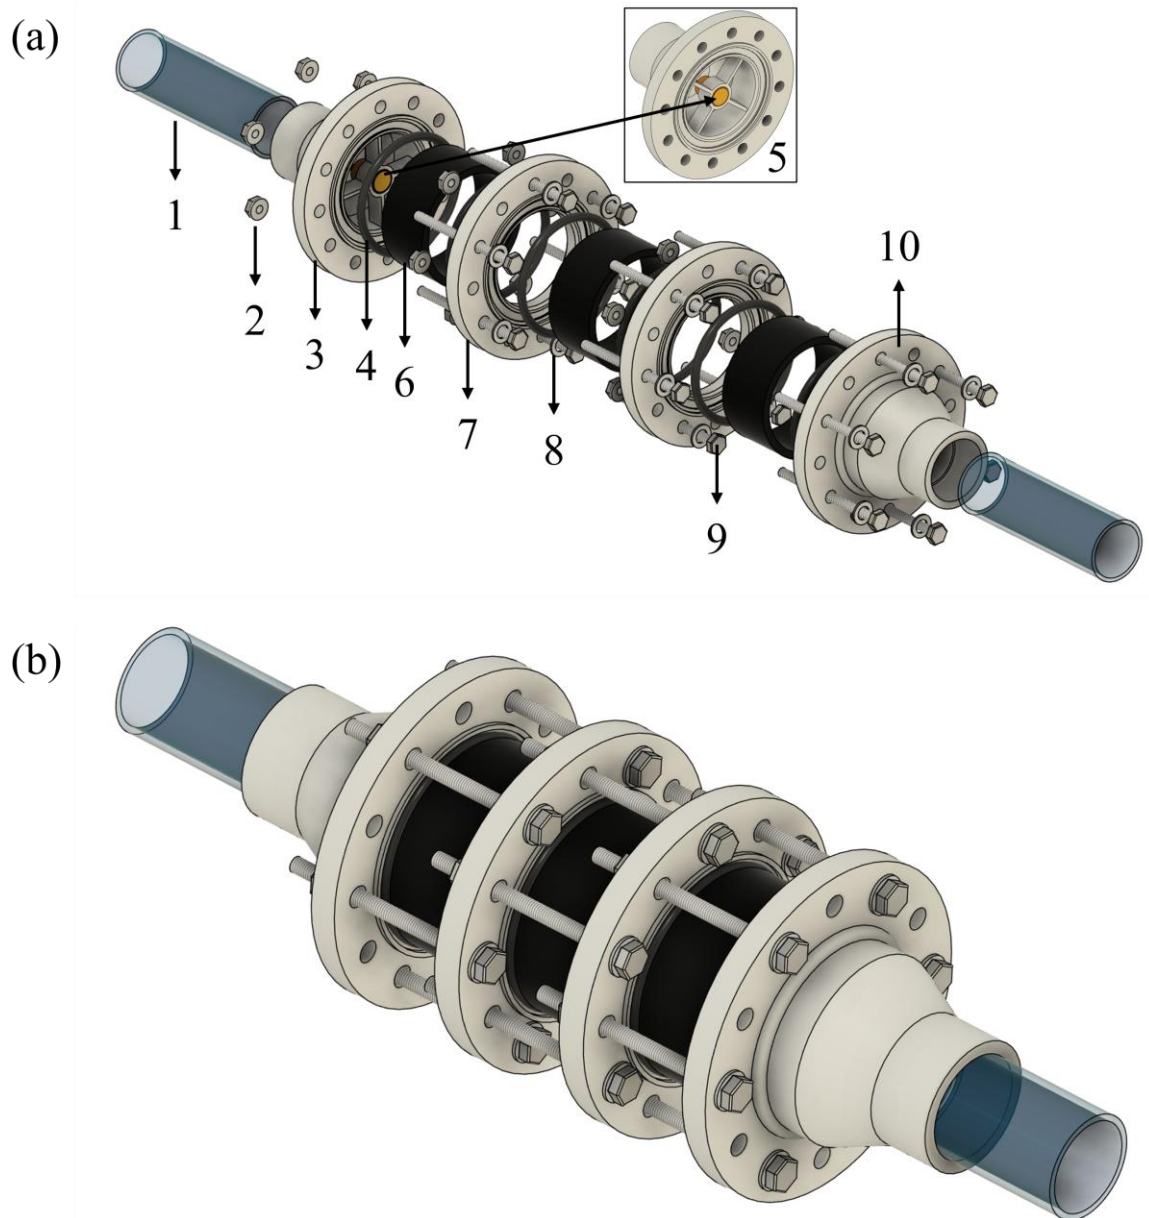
(a) Exploded view of a three-tube transducer in series module. Components include (1) PVC pipe, (2) nut, (3) pipe-to-tube connector for fixing the swPCD, (4) rubber O-ring, (5) swPCD, (6) tube transducer, (7) tube-to-tube connector, (8) bolt washer, (9) bolt, (10) pipe-to-tube connector. (b) Mounting diagram for the three-tube transducer series module.
